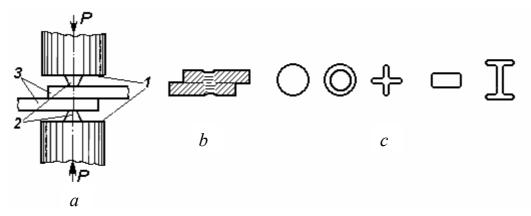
Cold welding: *a)* scheme of spot welding; *b)* welding joint; *c)* shapes of welded spots
